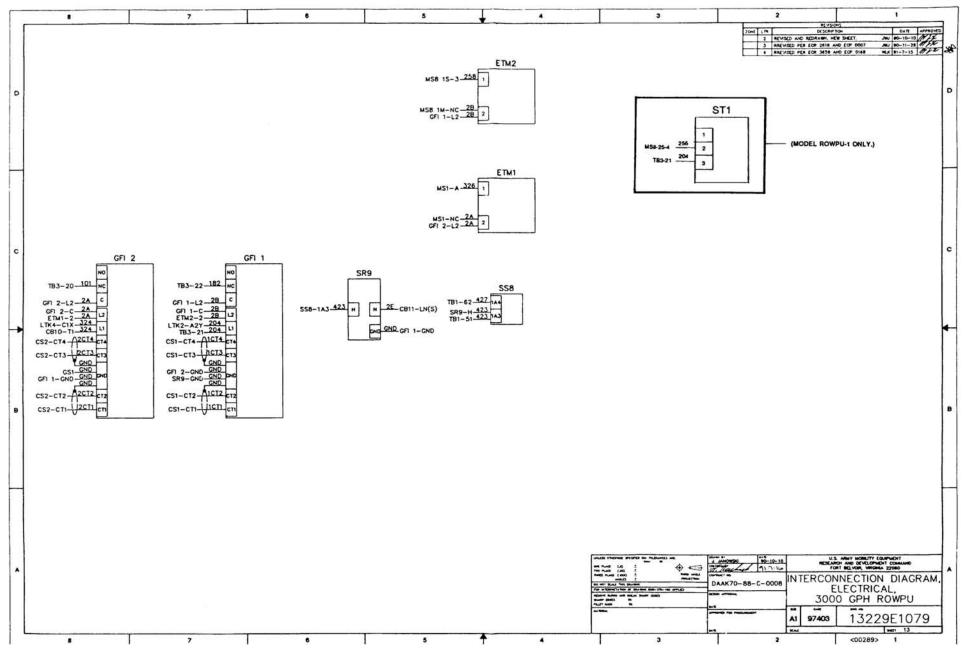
(Sheet 13 of 16) FP-47/(FP-48 blank)
